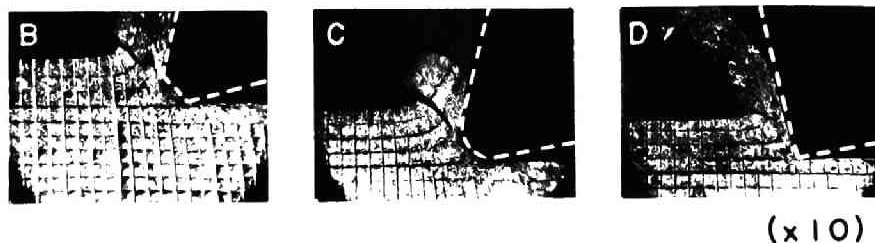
Typical photographs of cutting process for Lipowitz alloy (discontinuous chip formation) [Tool material, carbon tool steel; B: flat-edged tool, C: round-nosed tool, and D: negative rake sharp-edged tool; dry]
